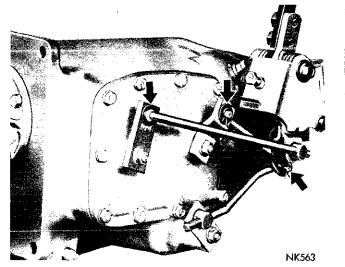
Floor-Mounted Manual Transmission Gearshift Mechanism—Lubrication Points
